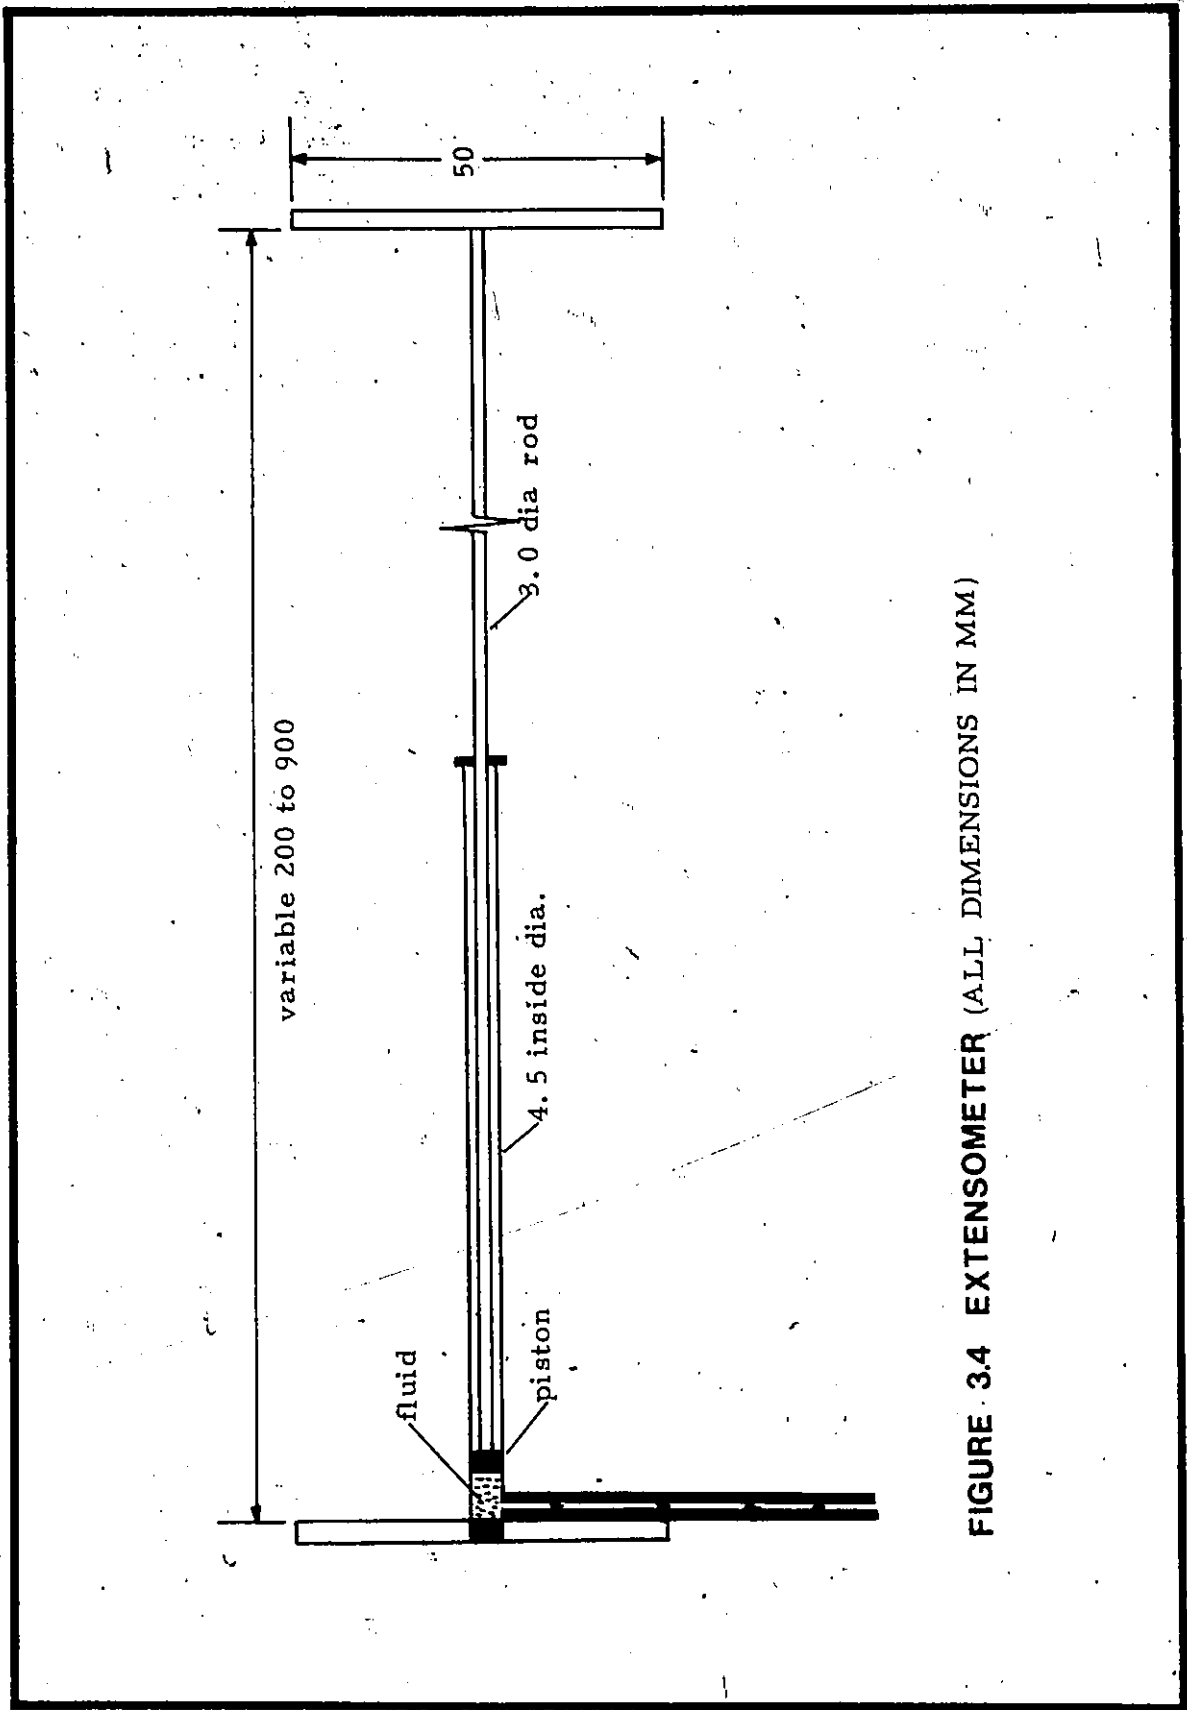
EXTENSOMETER (ALL DIMENSIONS IN MM)
